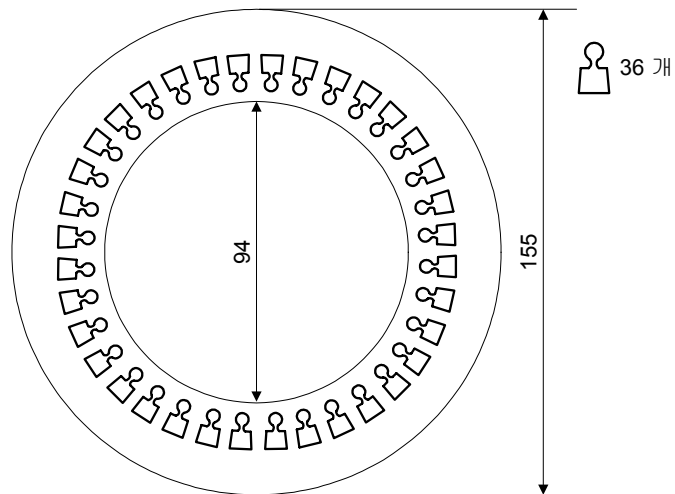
Dimension of rotor core of □ slot type IM.
